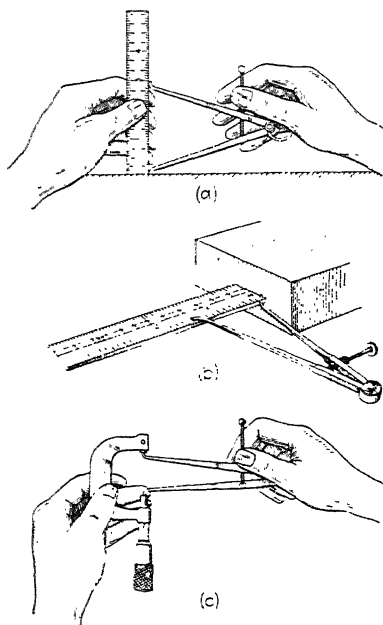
For setting or for reading the measurement of an inside caliper.
